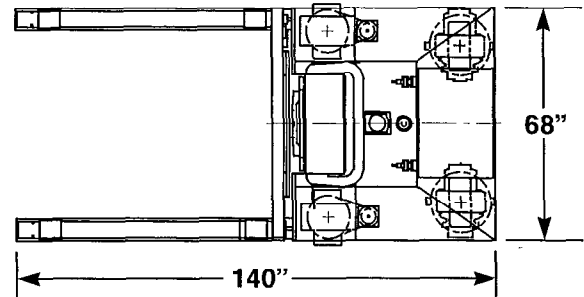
The AGV's four-wheel steering two drive/steer wheels and two non-driven, rotating wheels
